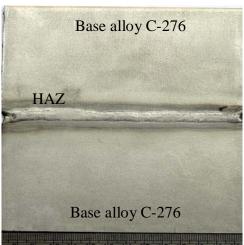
Photograph of weld joint produced by Autogenous PCGTA
